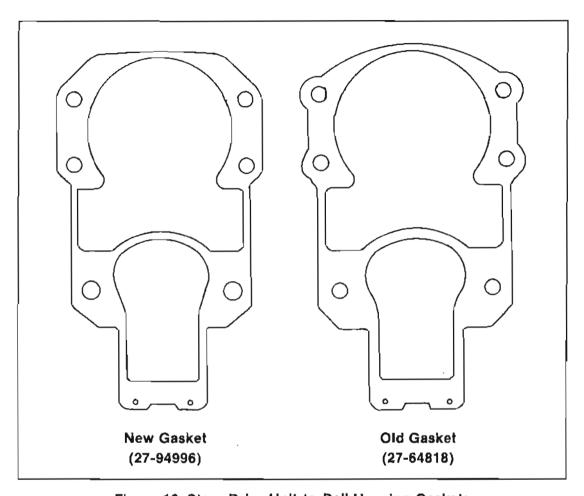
Stern Drive Unit to Bell Housing Gaskets
